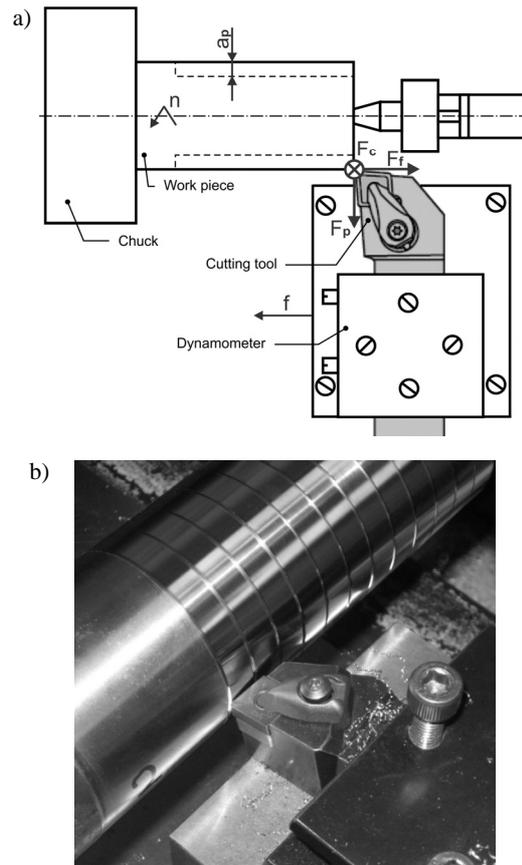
Kinematic scheme (a) and photography of work piece and tool (b)
